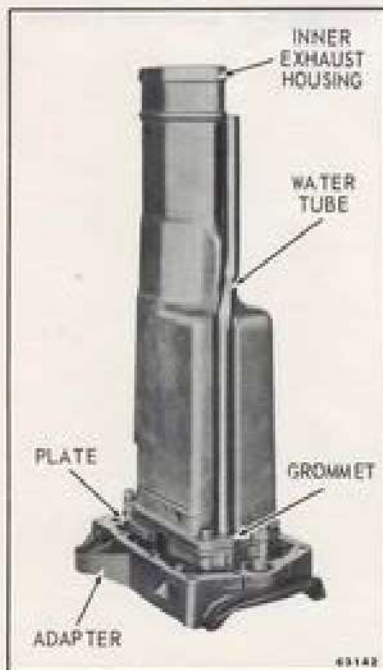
Inner Exhaust Tube, Water Tube and Plate Adapter
